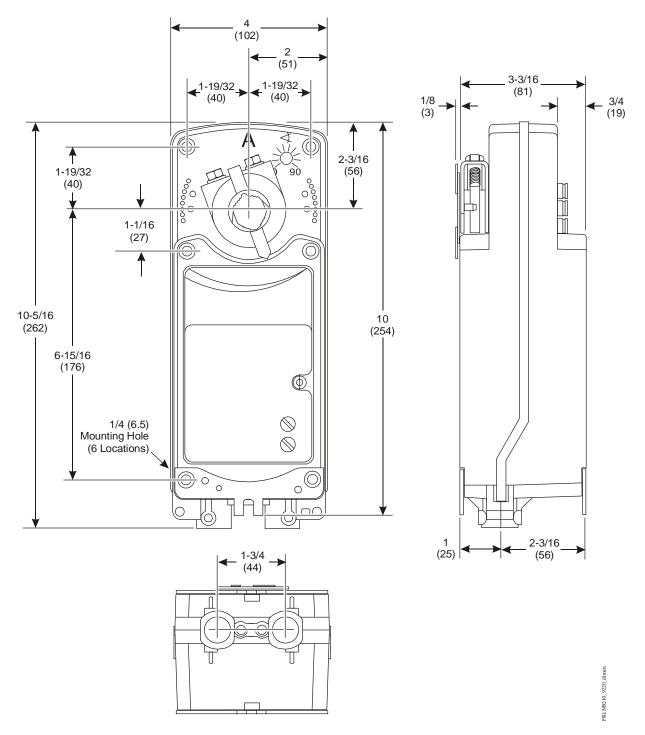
M9210-HGx-3 Proportional Electric Spring Return Actuator Dimensions, in. (mm)
